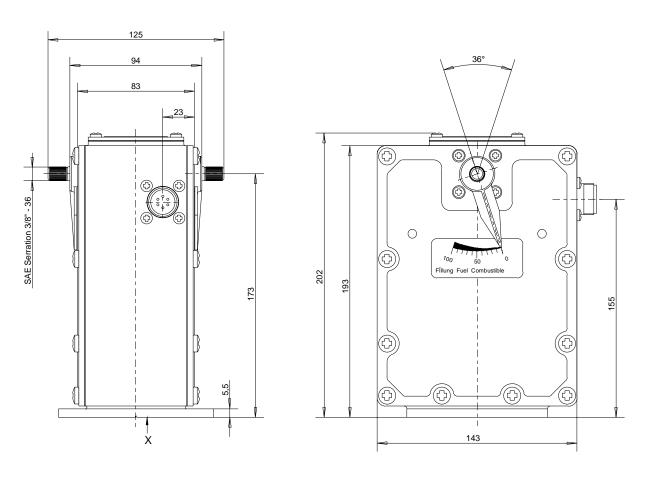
Dimensional Drawing StG 6-01 and StG 6-02 V
